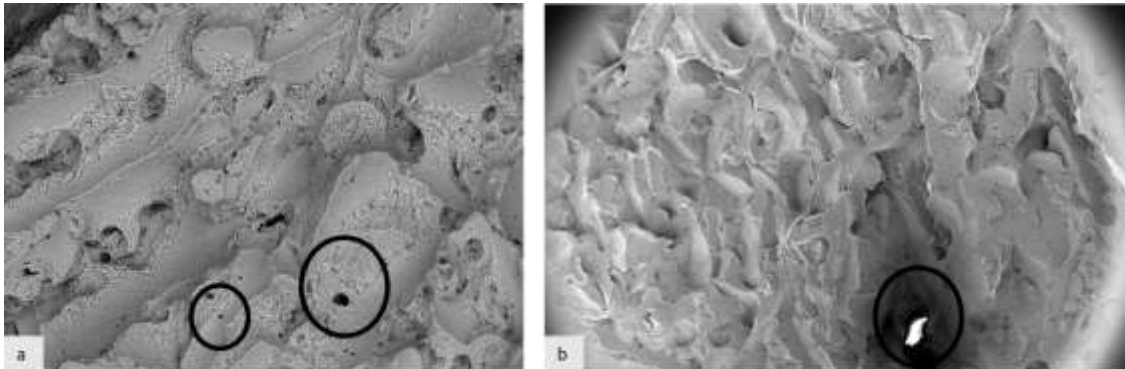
Fracture Surfaces Indicating a) Porosities b) Inclusions
